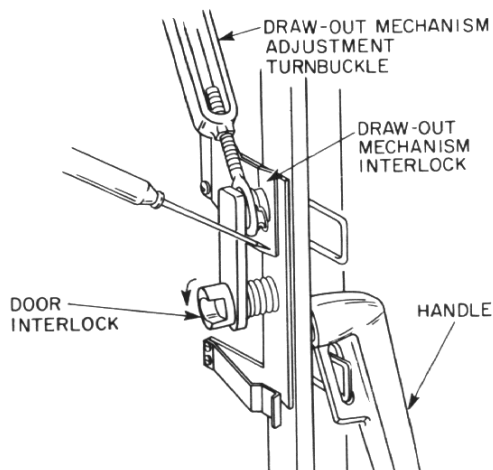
Over-riding Interlock to Engage Contactor with Door Open
